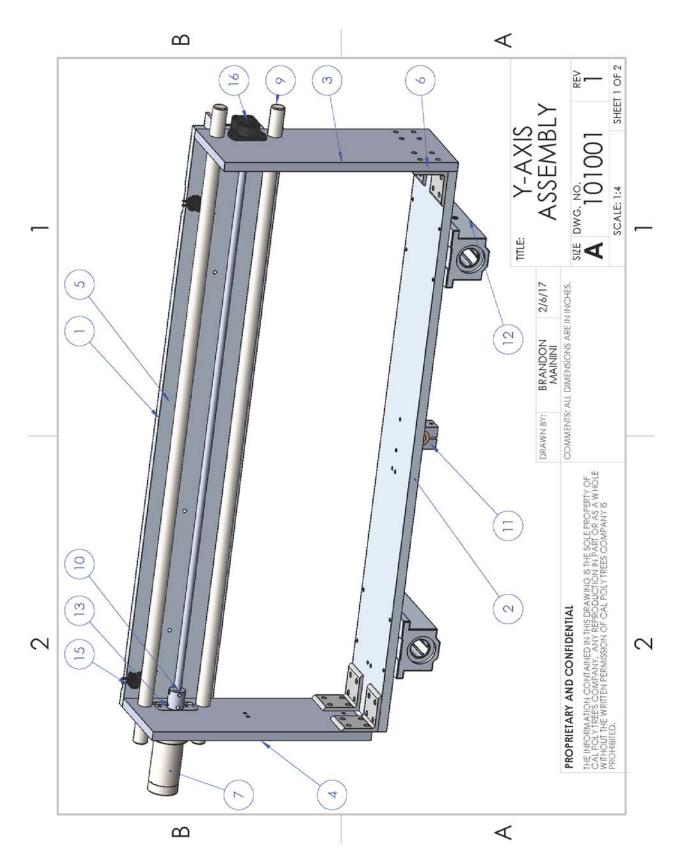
Y-Axis Assembly Detail Drawing (Page 1 of 2)
